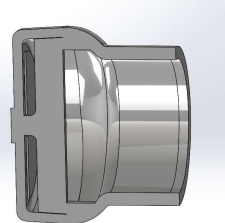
Section-view of speaking valve design iteration SV-1 (support bar is half of the length of the original valve design) modeled in CAD using SolidWorks
